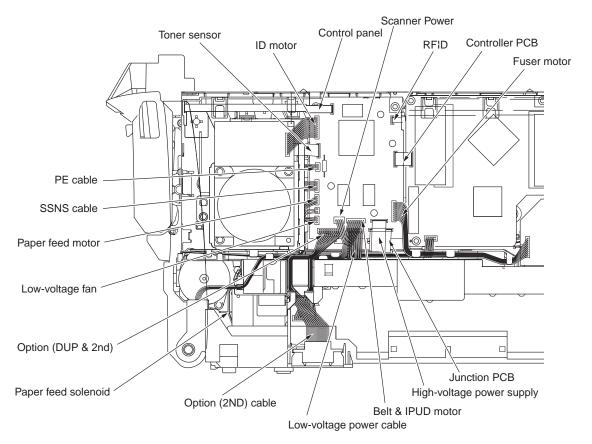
Cable route diagram of print engine controller PCB
